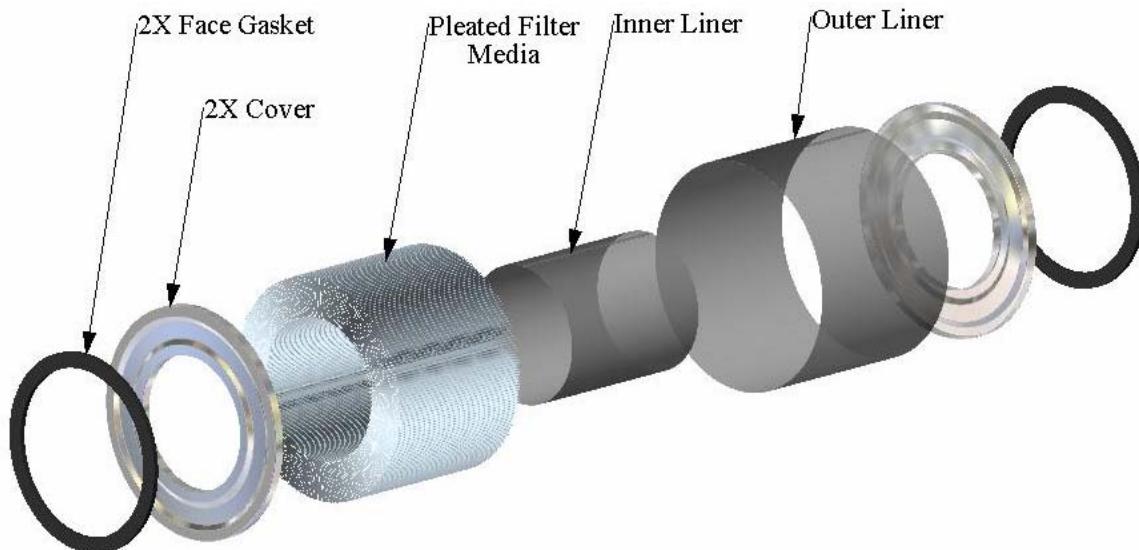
CBR/TIC HEPA Filter Assembly Exploded View
